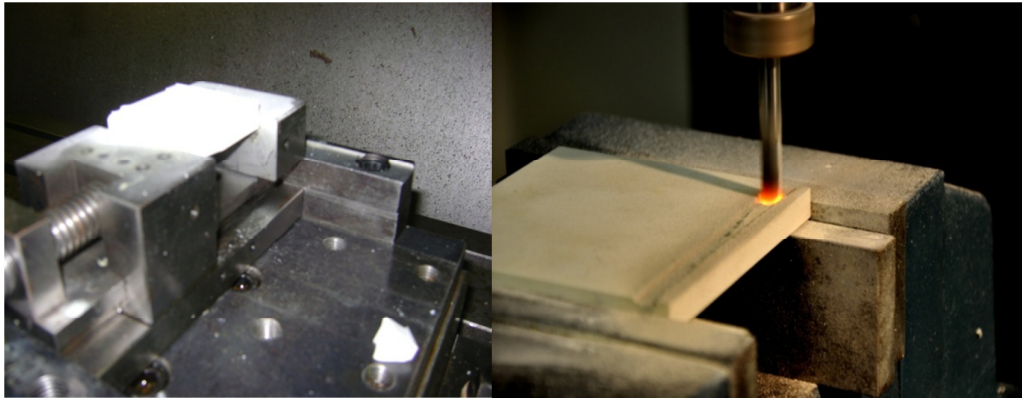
Brittle fracture and tool failure at high critical cutting parameters
